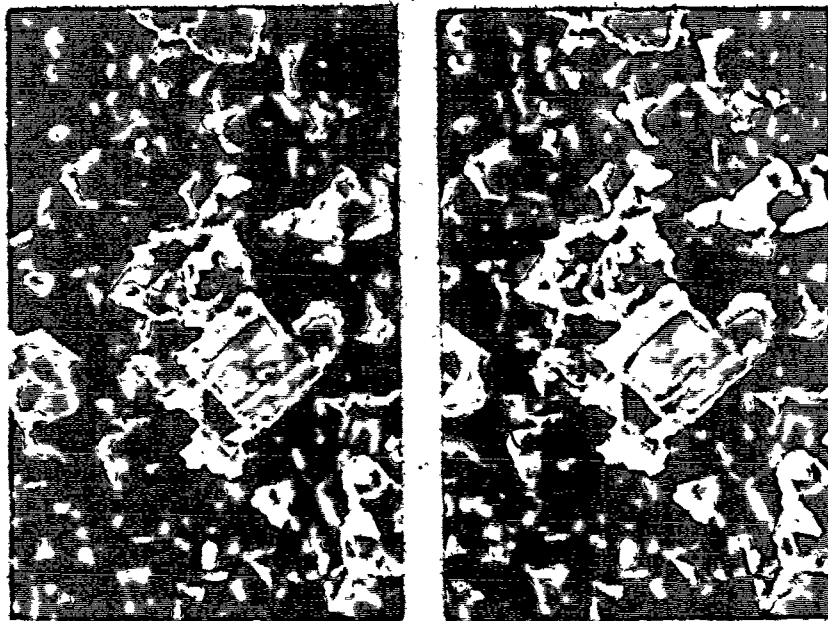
Stereo picture of fracture surface of WPC carbide tool used for machining 4340 steel hardened and tempered to 380 BHN (interrupted cutting case).
